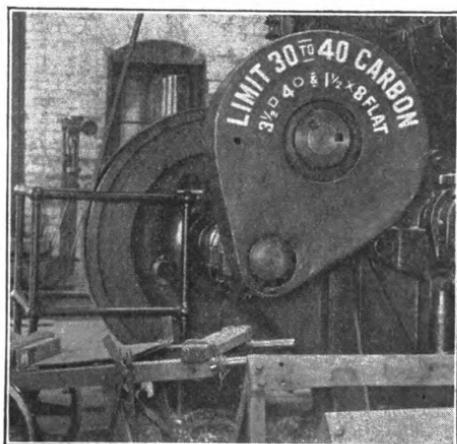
Size and hardness of material which can safely be sheared, plainly marked on side of machine to prevent overloading. (Rule 157)
